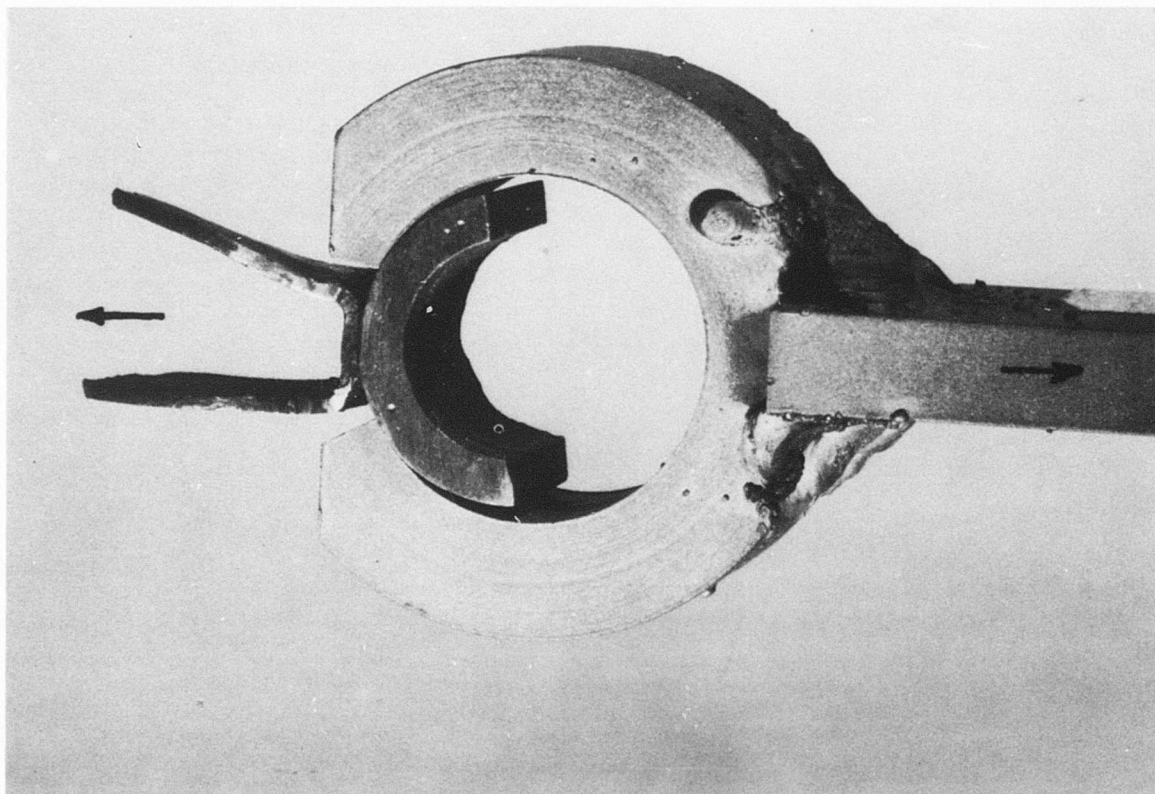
Fixture used to hold section of cartridge container during tensile test. The test was designed to determine the strength of the spot weld between a fin and the cartridge container support.
